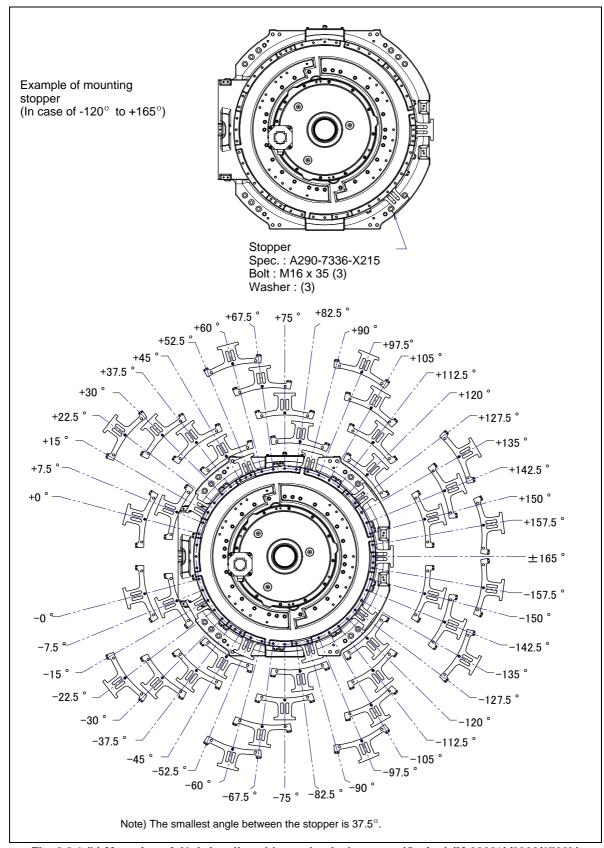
(b) Mounting of J1-Axis adjustable mechanical stopper (Option) (M-2000iA/2300/1700L)
